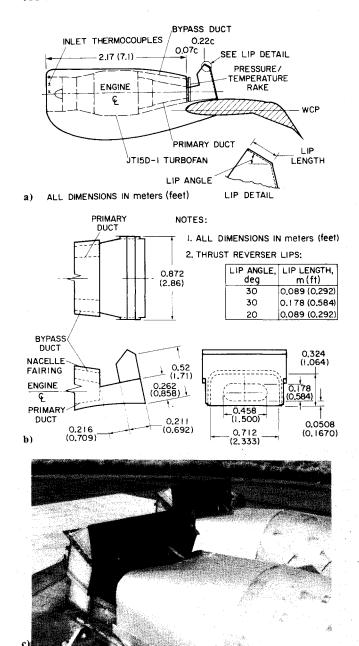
Thrust reverser geometric details: a) reverser/model integration details; b) reverser assembly details; c) thrust reverser installation.
